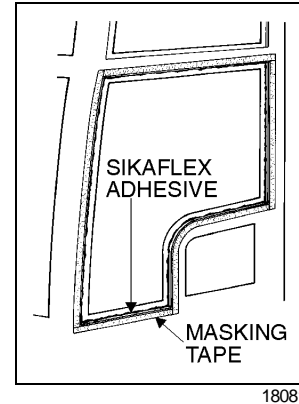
ADHESIVE MOUNTED WINDOWS
